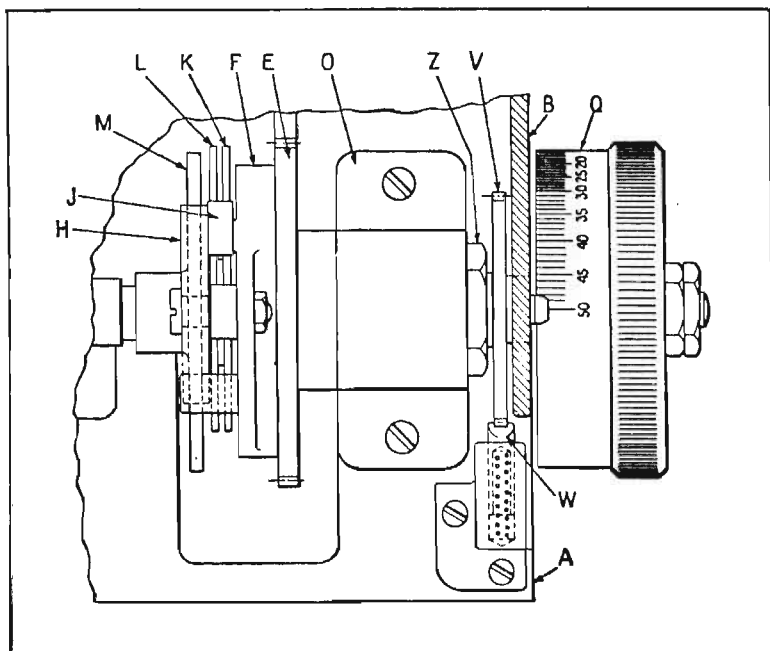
Partial Plan View of Feeding Mechanism. Index Setting is Held by Plunger *W* Engaging Gear *V*.
